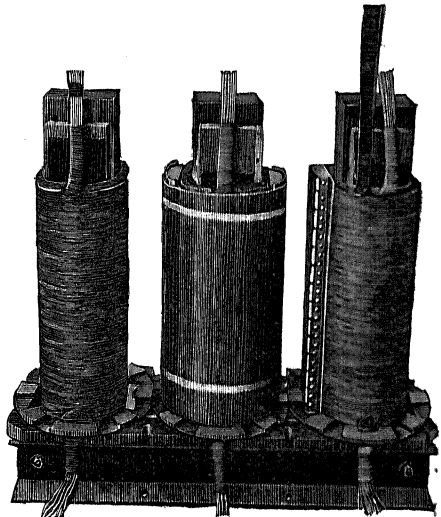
Modern High Reactance Three-phase Transformer, partly assembled, showing Magnetic Shunts.
